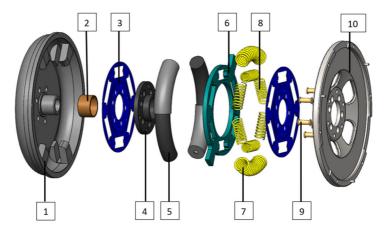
Parts of Pneumatic Dual-Mass Flywheel with a metal flexible unit
